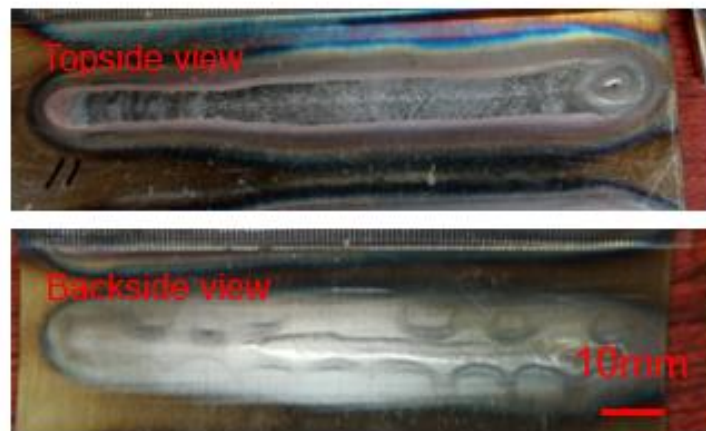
Topside view and backside view of weld bead with optimized PID gains
